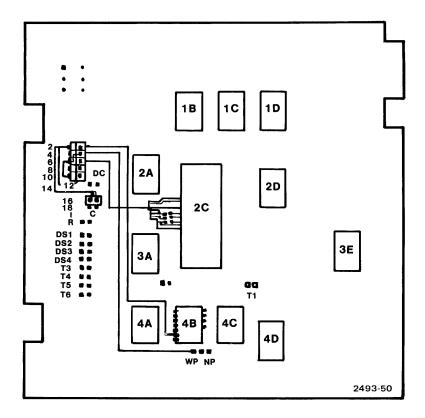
Wire Harness and Plug Location for Disc Drive with 118-1004-XX Board.
